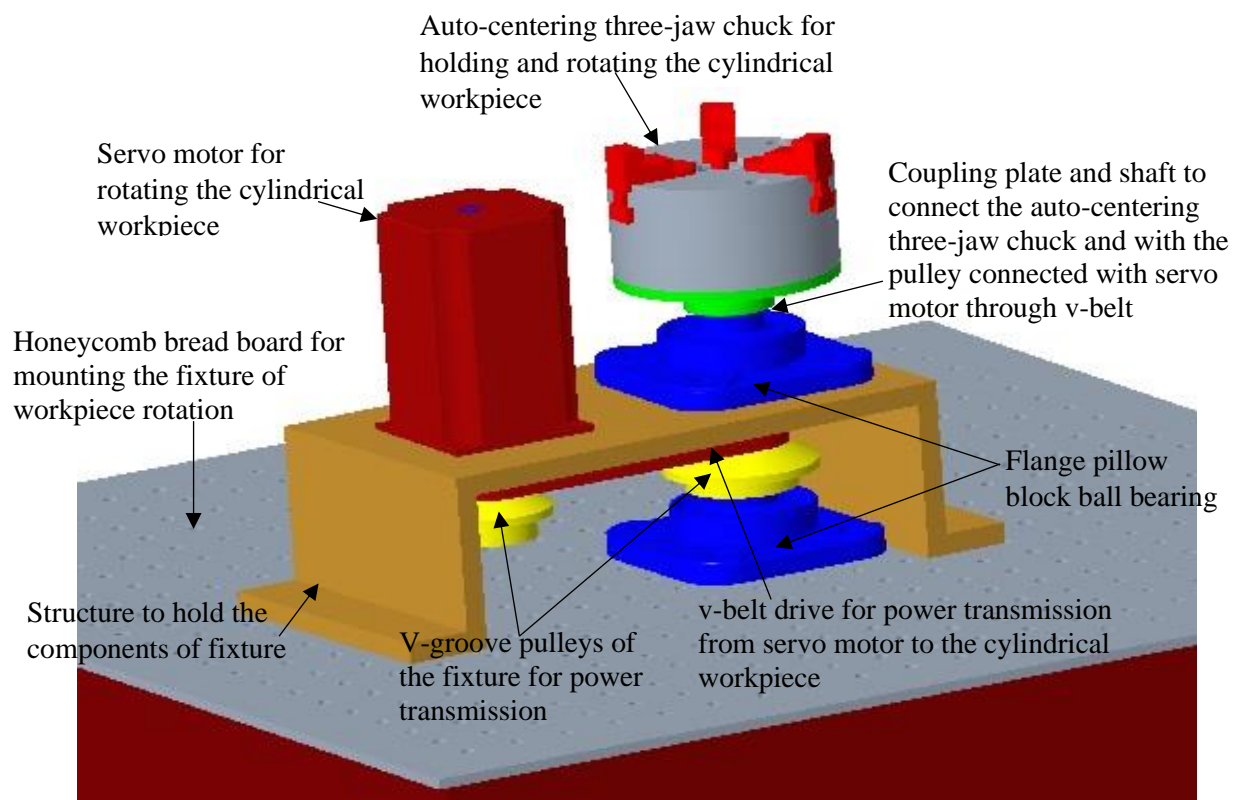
Three-dimensional CAD model of the improved fixture for rotating the cylindrical workpieces of variable diameters.
